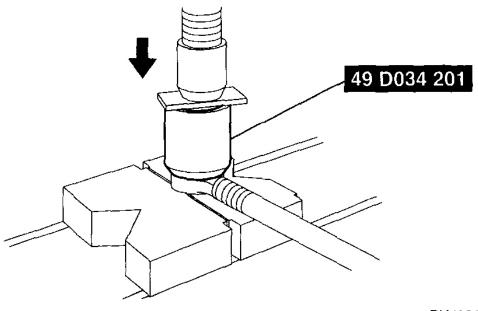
Disconnecting Ball Joint Using SST Courtesy of MAZDA MOTORS CORP.
